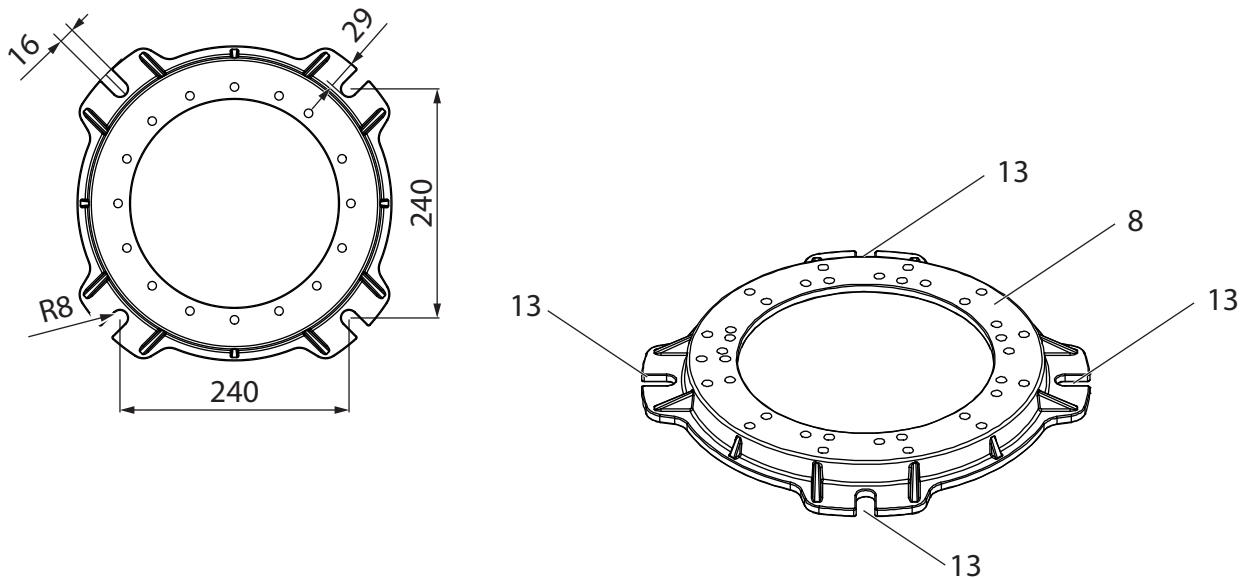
Mechanical installation – mounting base – example (dimensions in mm)
